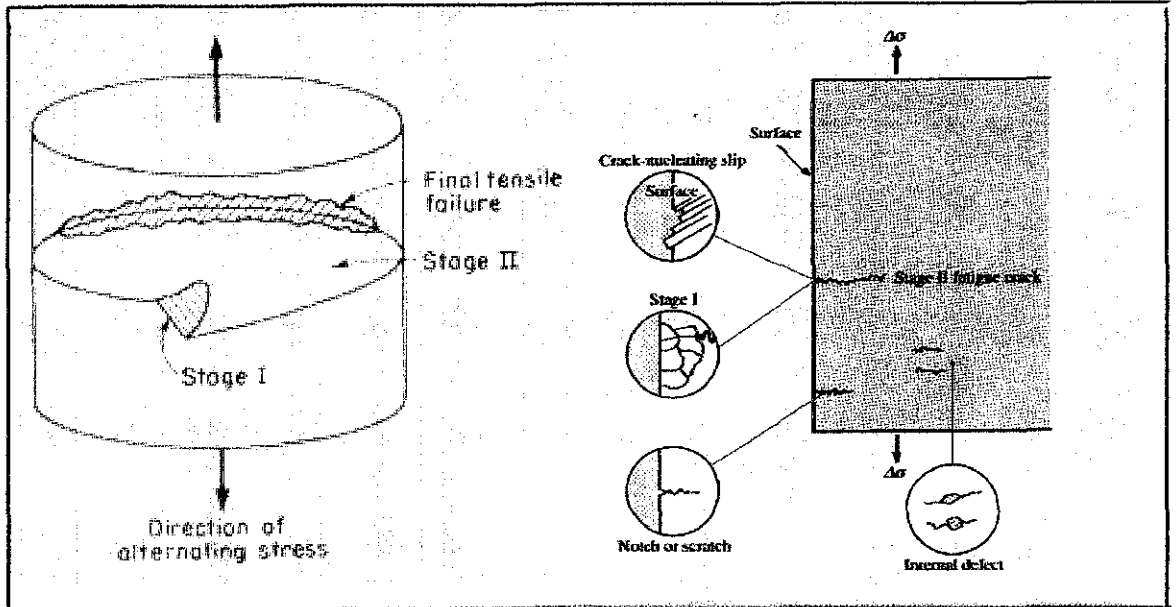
A diagram showing location of the 3 steps in a fatigue fracture under axial stress.
